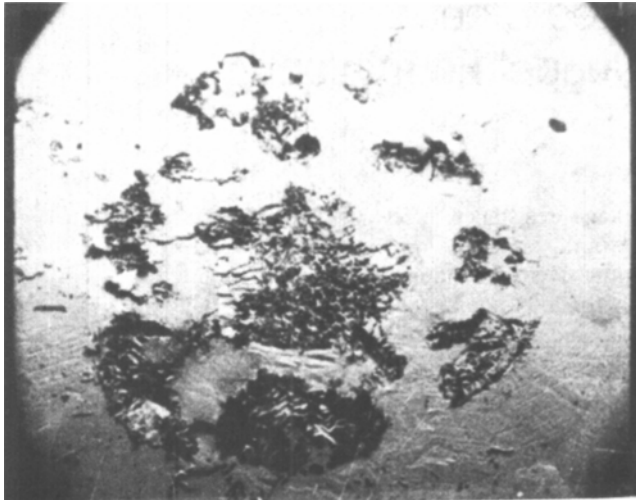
Faying interface after 1 cycle of a weld which forms the minimum acceptable nugget in 12 cycles (G90, t. cone 1500 amps) showing that the zinc coating is only partially melted.
